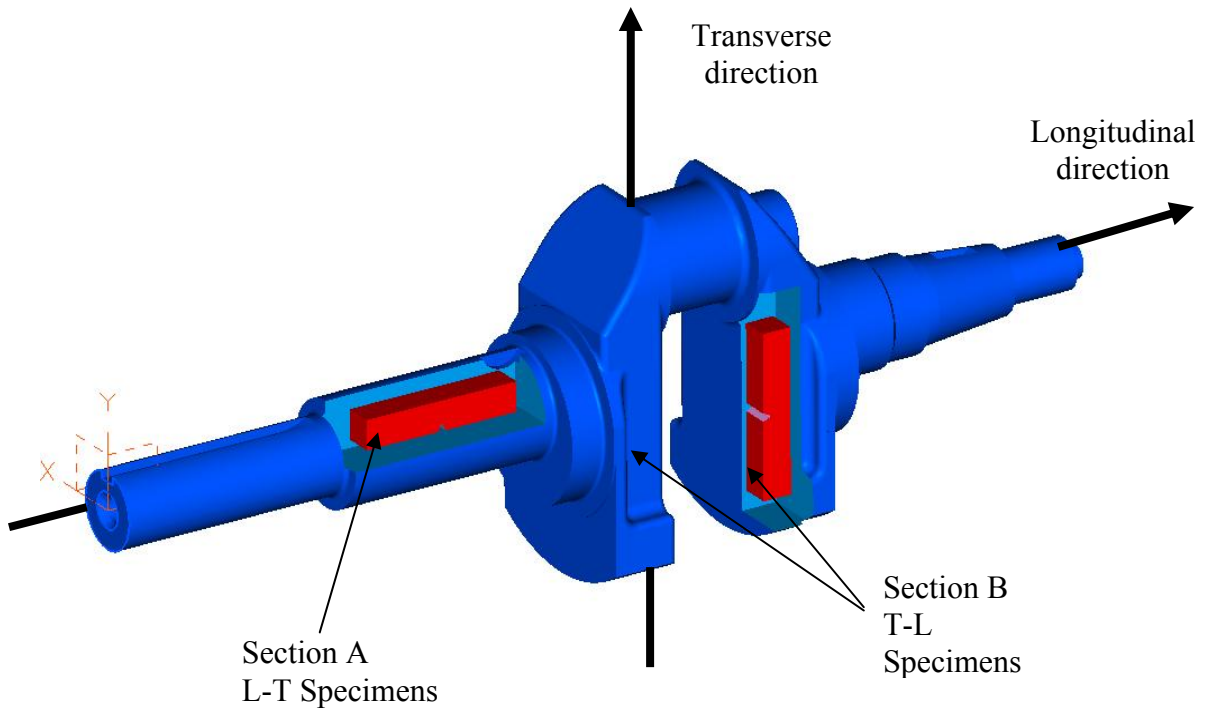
Locations on the crankshaft where Charpy v-notch specimens were machined from.
